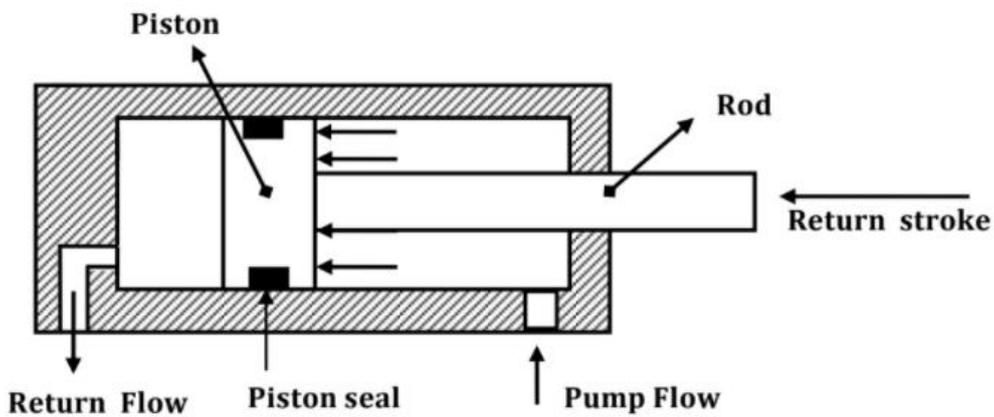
b) Double acting Cylinder with piston rod on one side (Return stroke)
